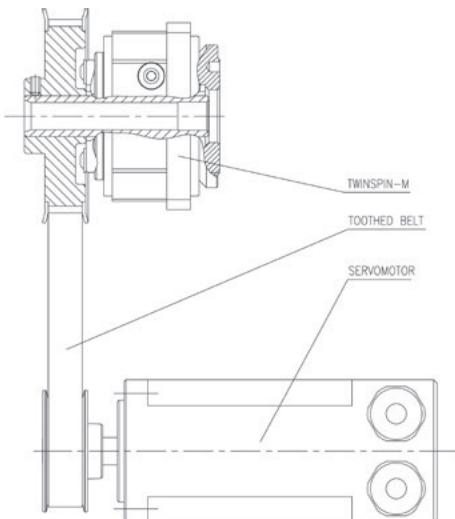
Example of the use of the hollow-shaft version of the reduction gear, driven through a toothed belt
